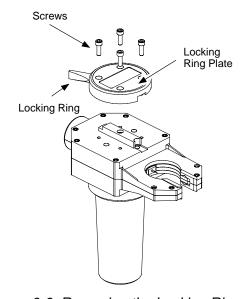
Removing the Locking Ring and Locking Ring Plate
